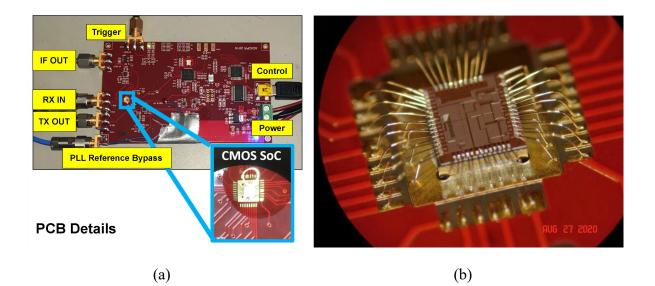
(a) DS/SS GPR PCB detail. (b) DS/SS GPR SoC assembled to PCB
